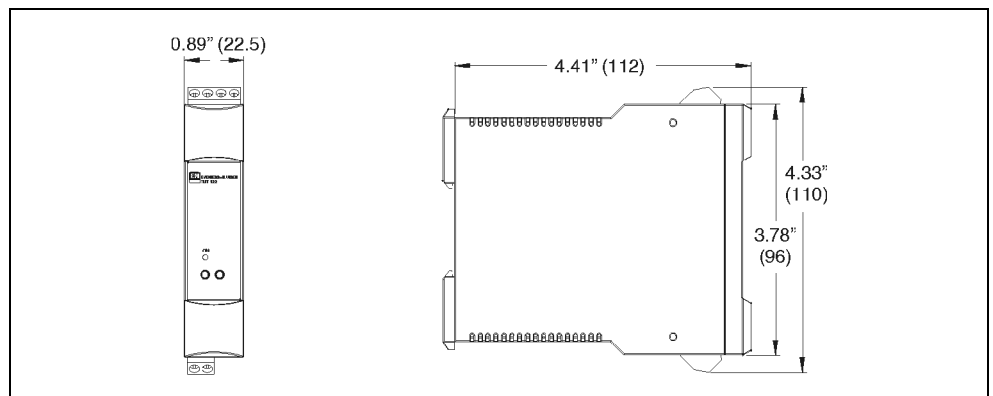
Dimensions of the DIN rail transmitter in inches (mm)
